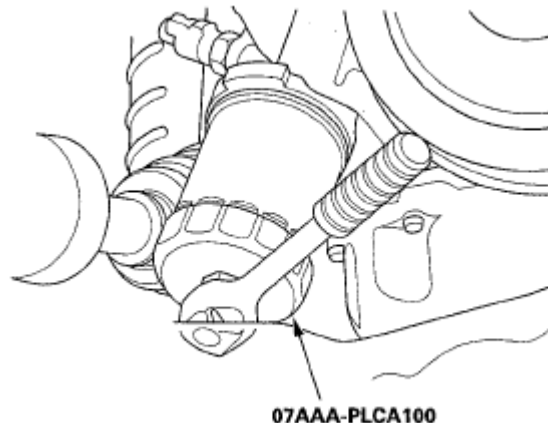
Identifying Oil Filter With Oil Filter Wrench
